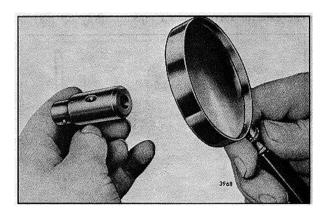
Examining Sealing Surface with a Magnifying Glass
